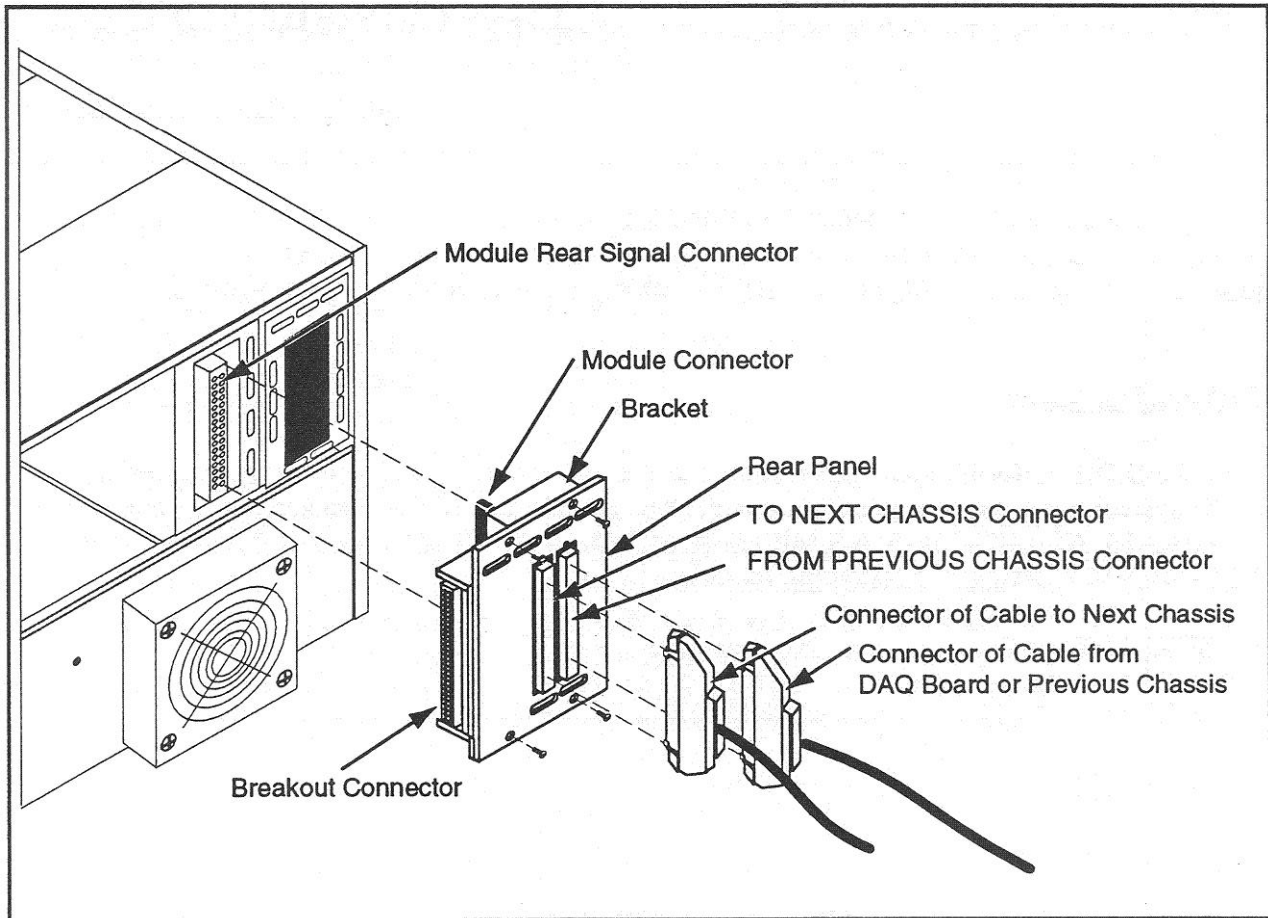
SCXI-1346 Shielded Multichassis Cable Adapter
